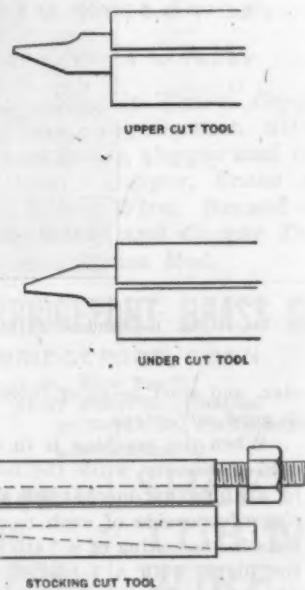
The Three Tools Used in the Planing of a Single Gear.
